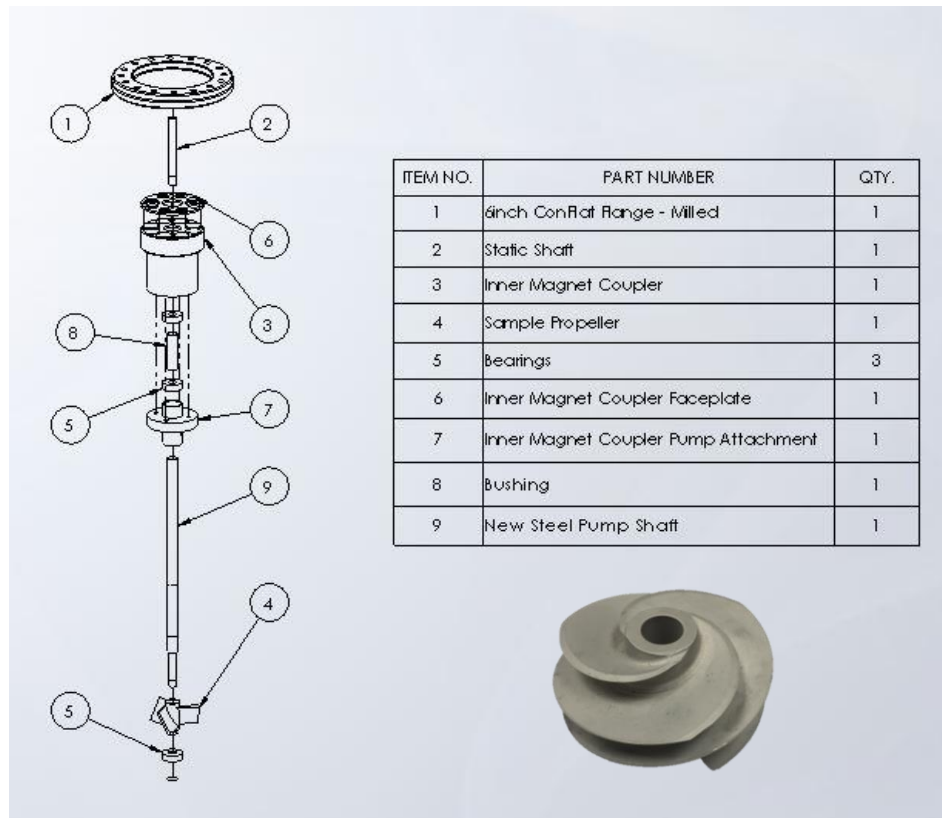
Inner Coupler Sub-Assembly and the impeller that was provided by NASA
